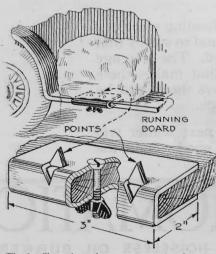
Sheet iron, bent over running board and bolted down, makes a good ice carrier.
